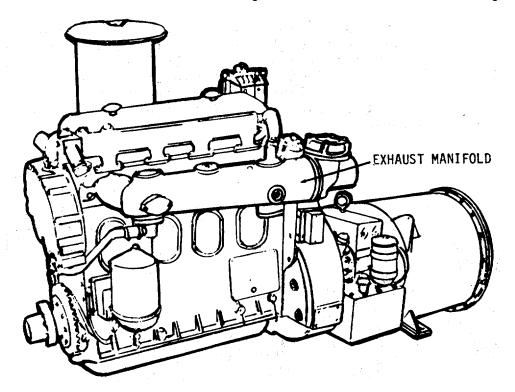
Water Cooled Exhaust Manifold Mounting
